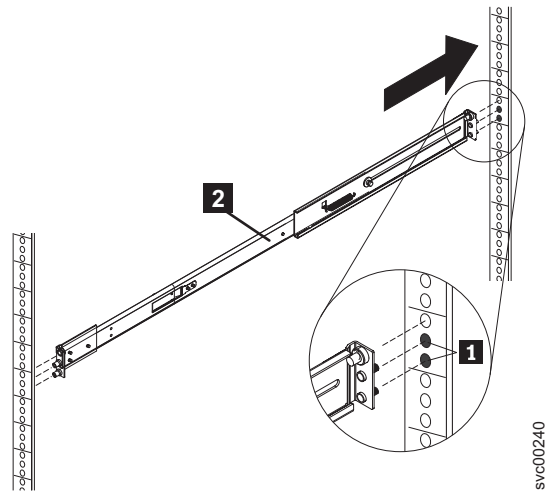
Inserting the right slide rail into the rear rack mounting flange
